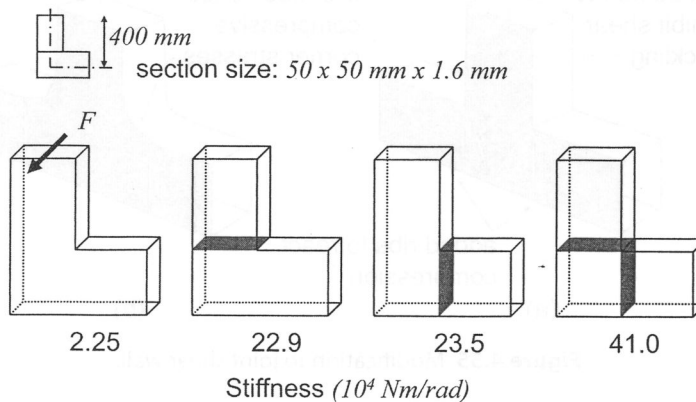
Effect of added bulkheads on out of plane joint rigidity.
